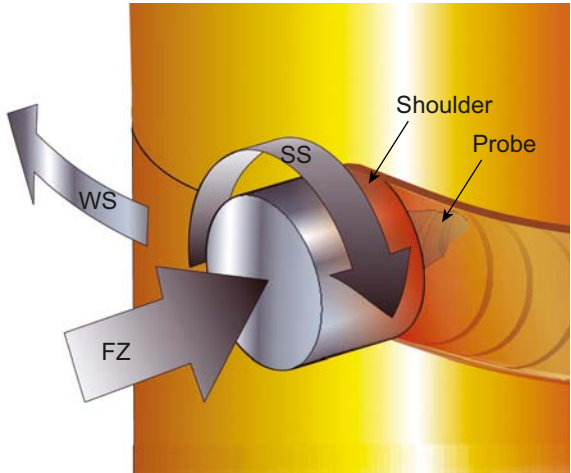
Welding parameters – spindle rotation (SS), welding force (FZ) and welding speed (WS).
